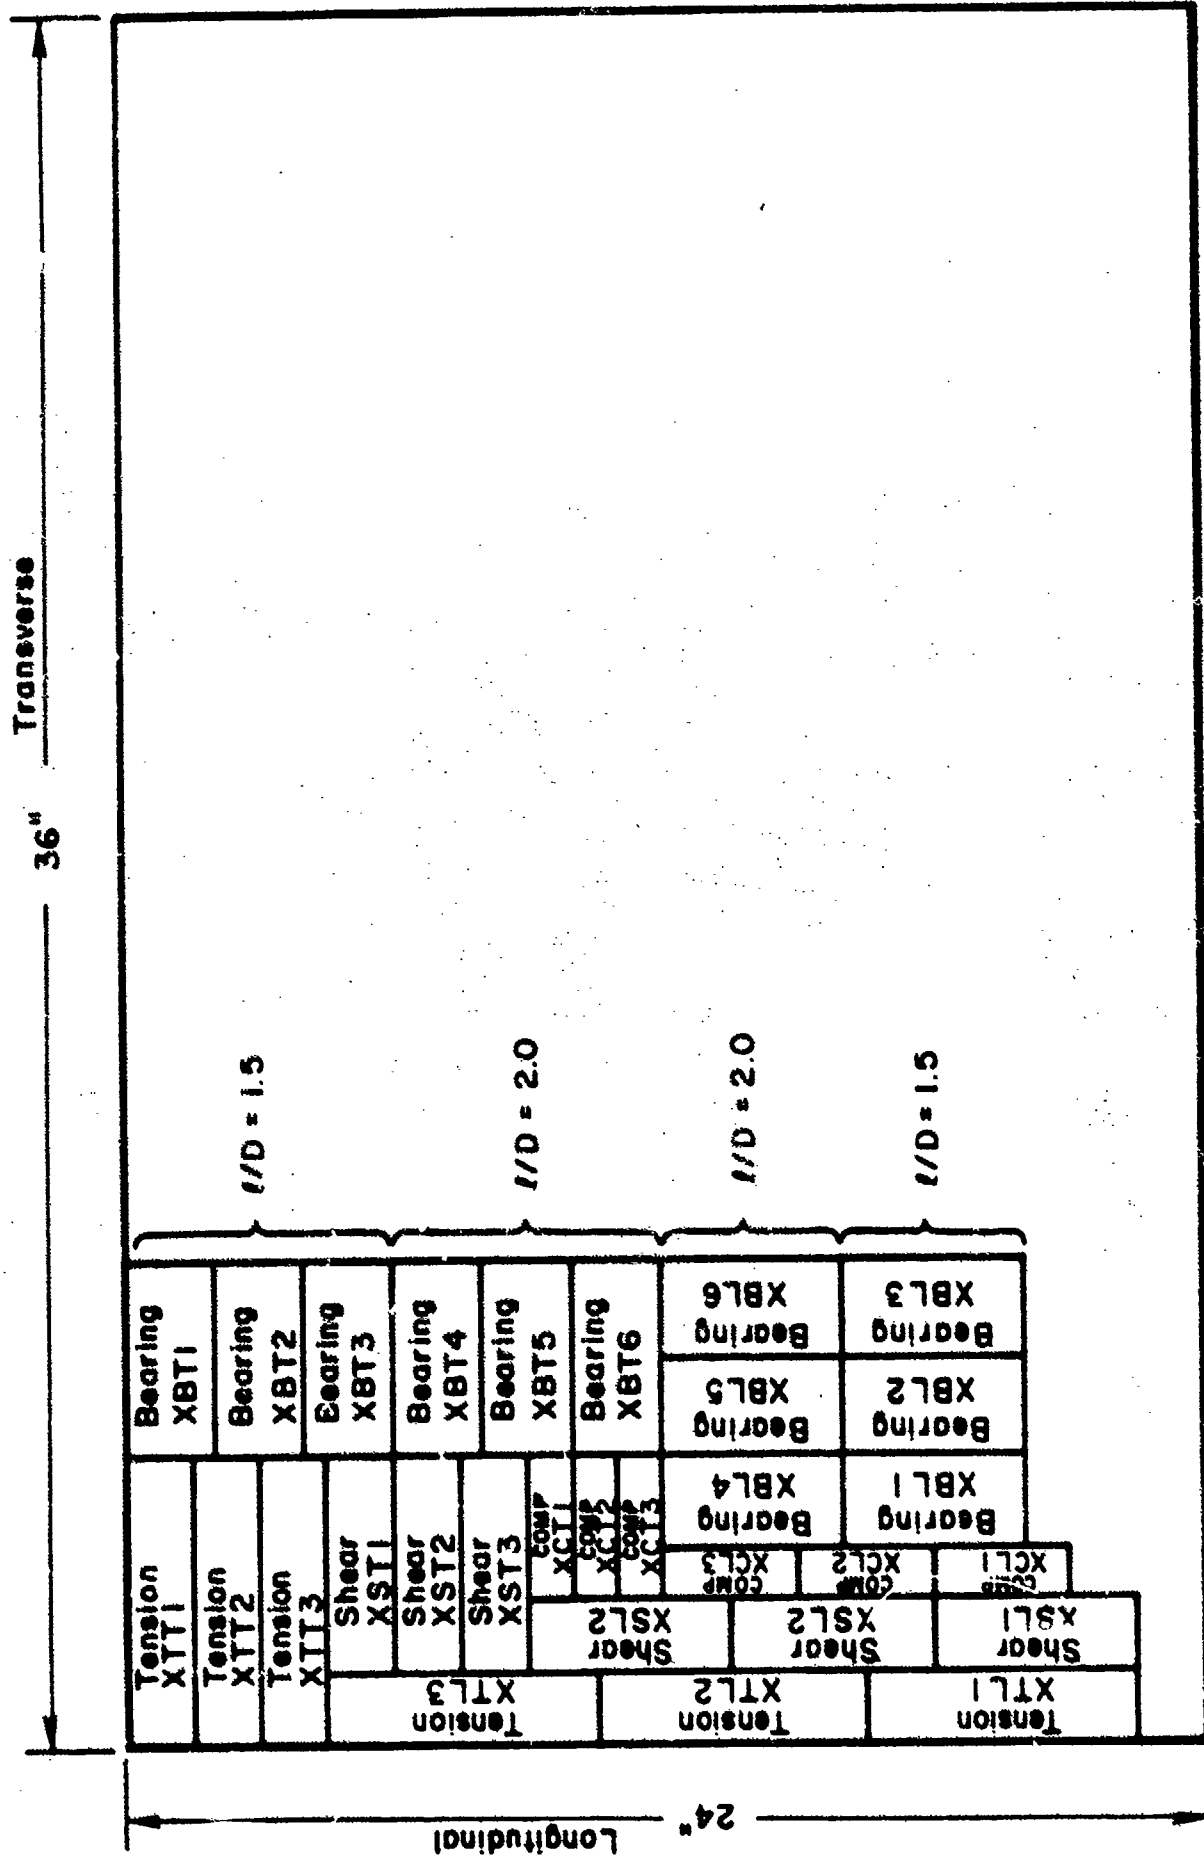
Location of test specimens for Inconel 718 sheet--0.045, 0.050, 0.080, 0.125, and 0.187 inches thick.
